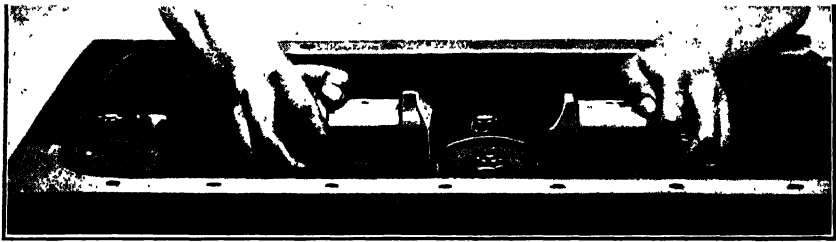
Fitting Crank-shaft Main Bearings.
